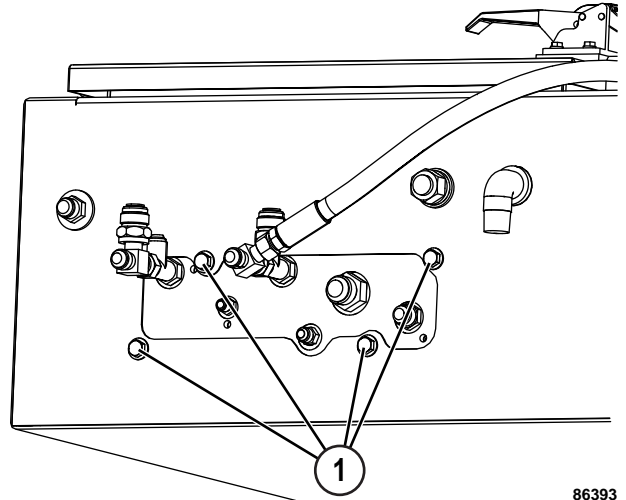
BRAKE MANIFOLD REMOVAL & INSTALLATION
